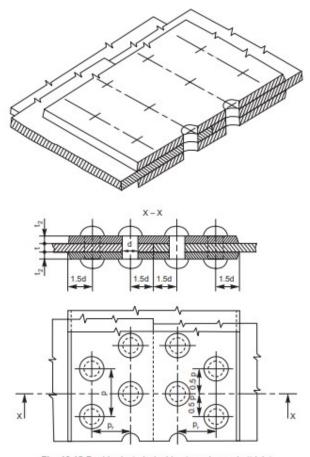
Double riveted, double strap zig-zag butt joint
